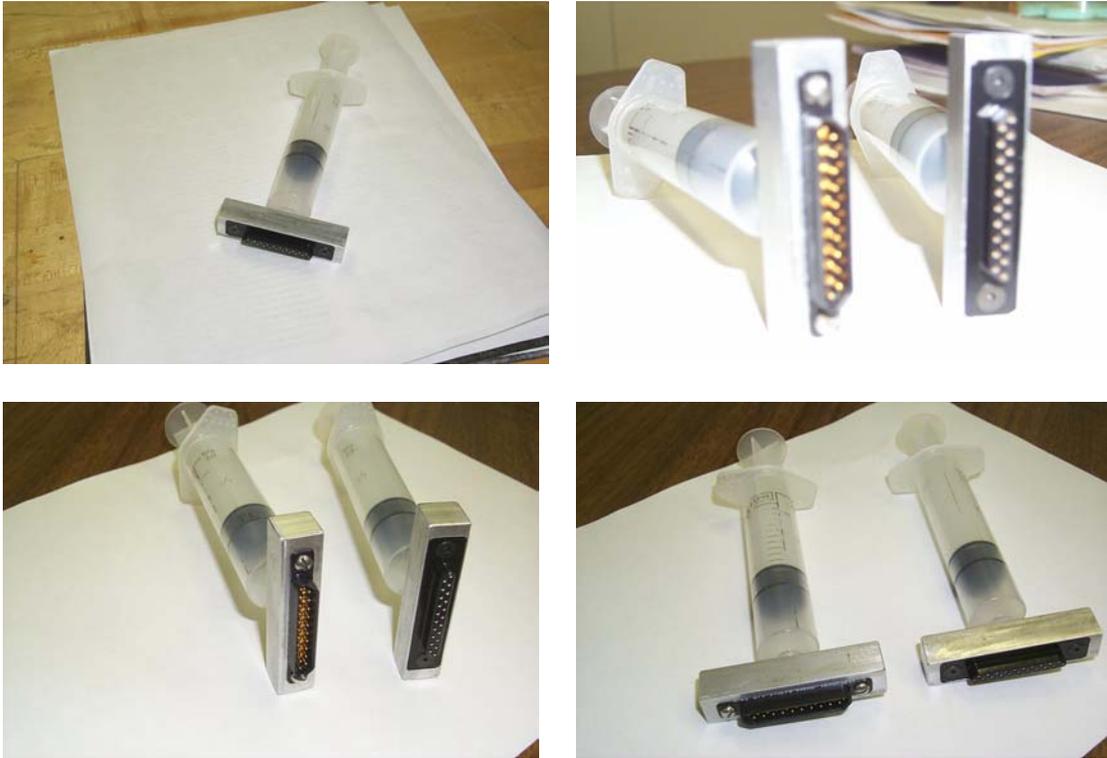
Photos of Test Fixtures Used For Mass Lubrication of Pins and Sockets
